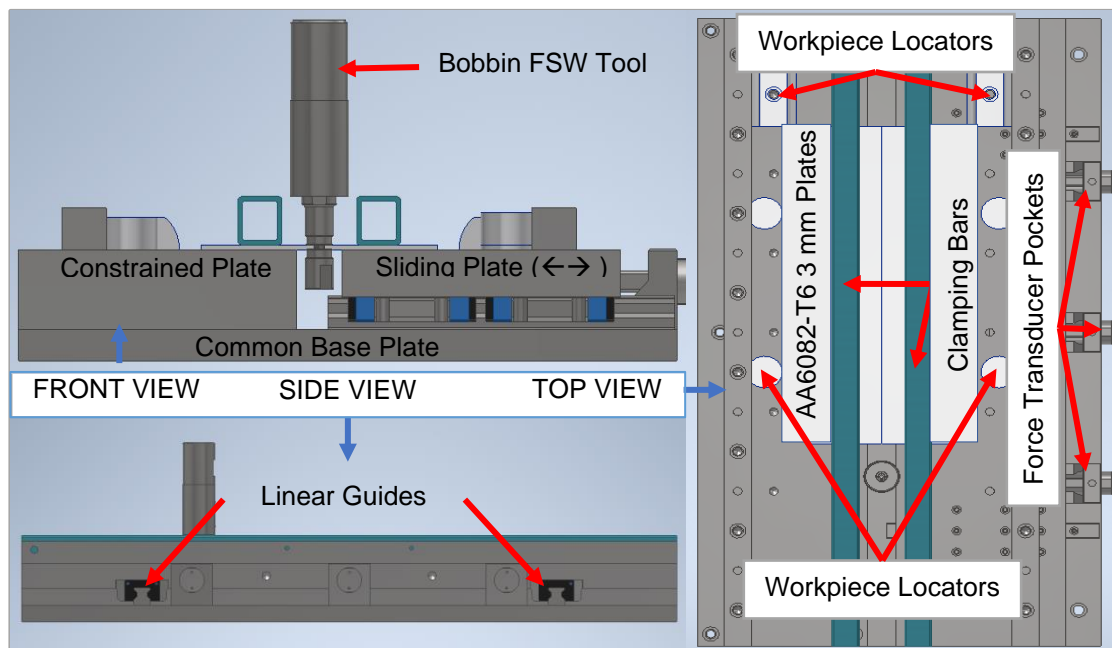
Design model of the Bobbin FSW Fixture and Tool
